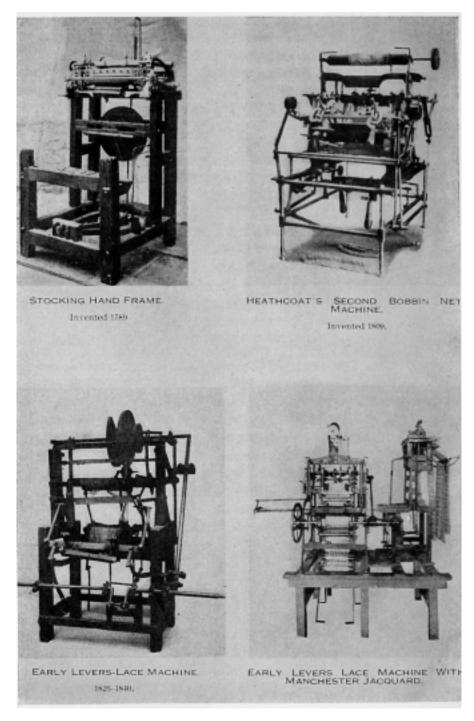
PLATE I. EVOLUTION OF BOBBINET AND LEVERS LACE MACHINES.
